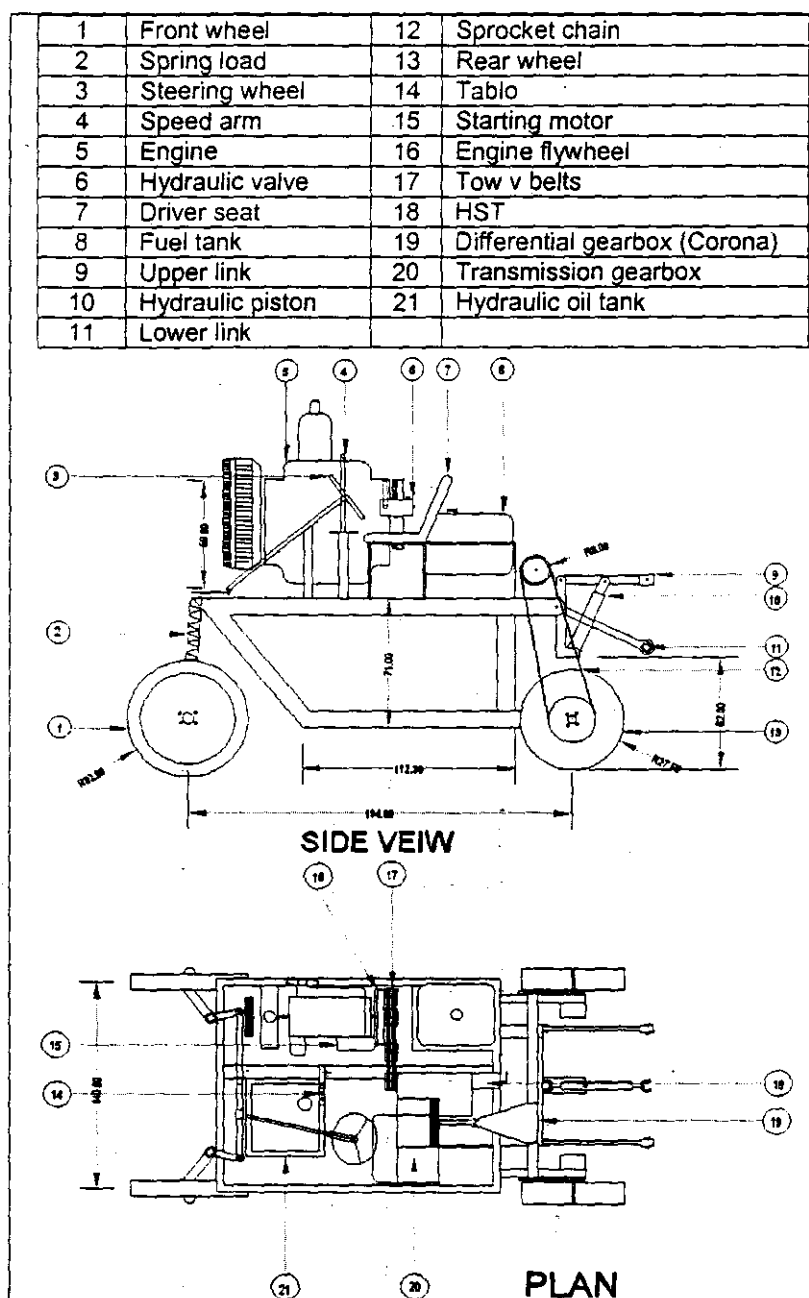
Side and plan views of the modified high clearance tractor prototype.
